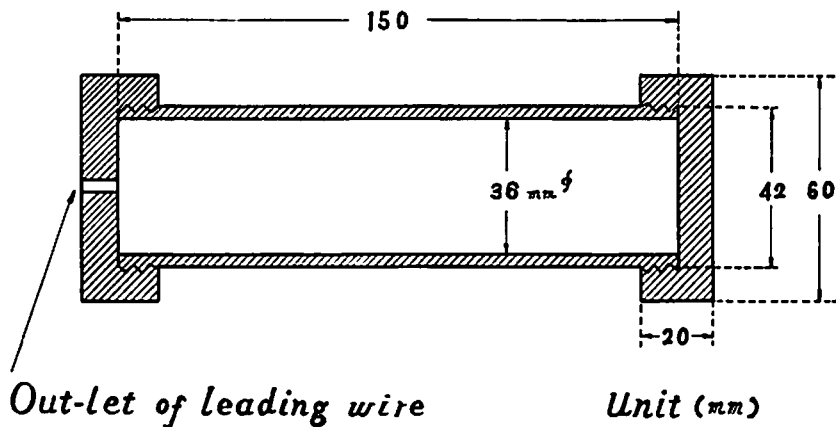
Apparatus for combustion of explosives by closed steel pipe.
